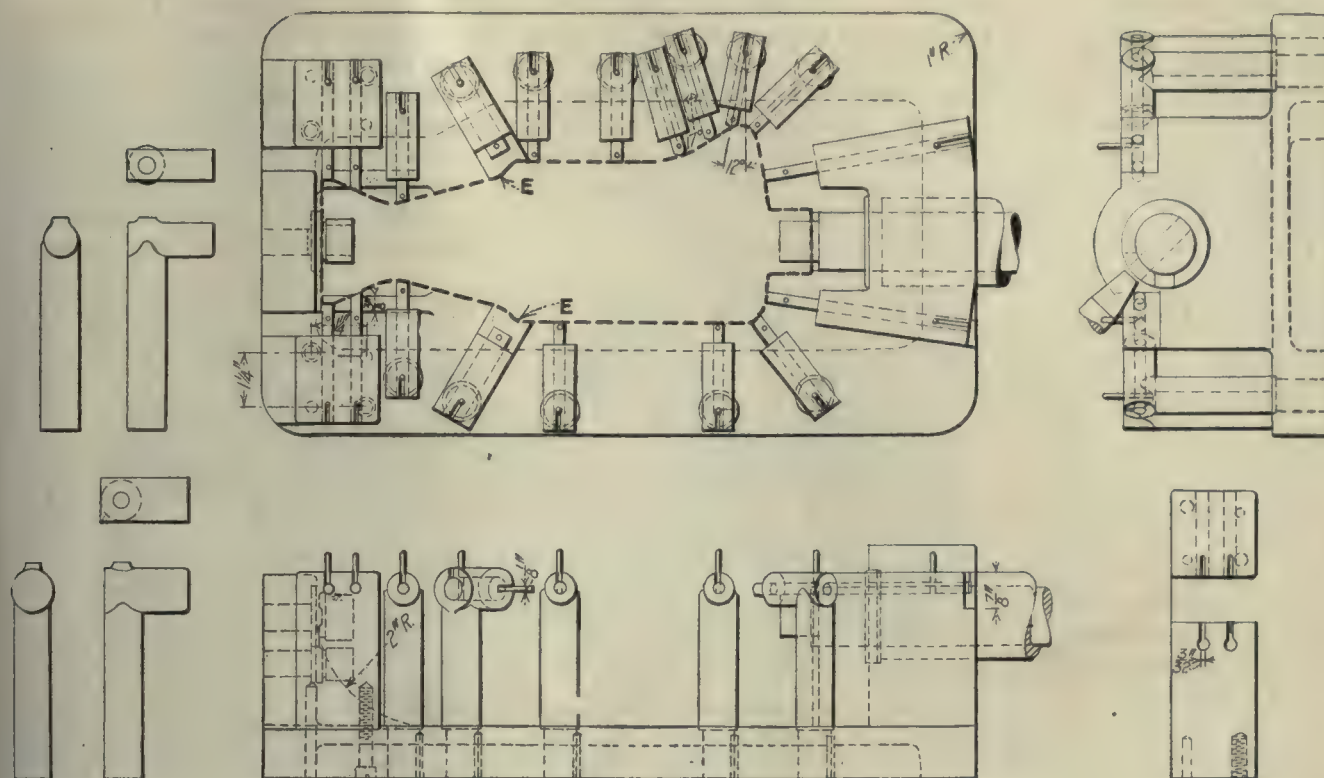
GAGING FIXTURE FOR RECEIVER CONTOUR
